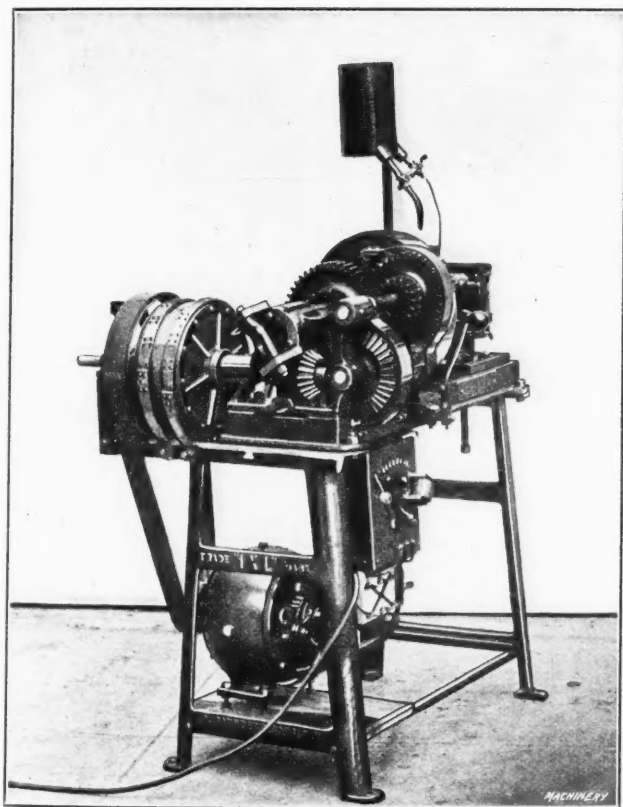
Operating Side of the Rebuilt Pipe Threader
